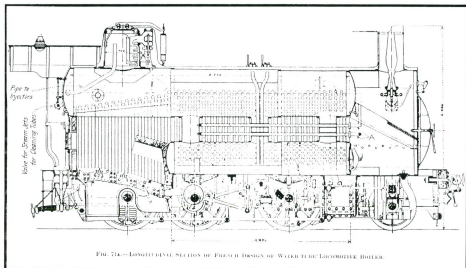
A—LONGITUDINAL SECTION OF FRENCH DESIGN OF WATER-TUBE LOCOMOTIVE BOILER
